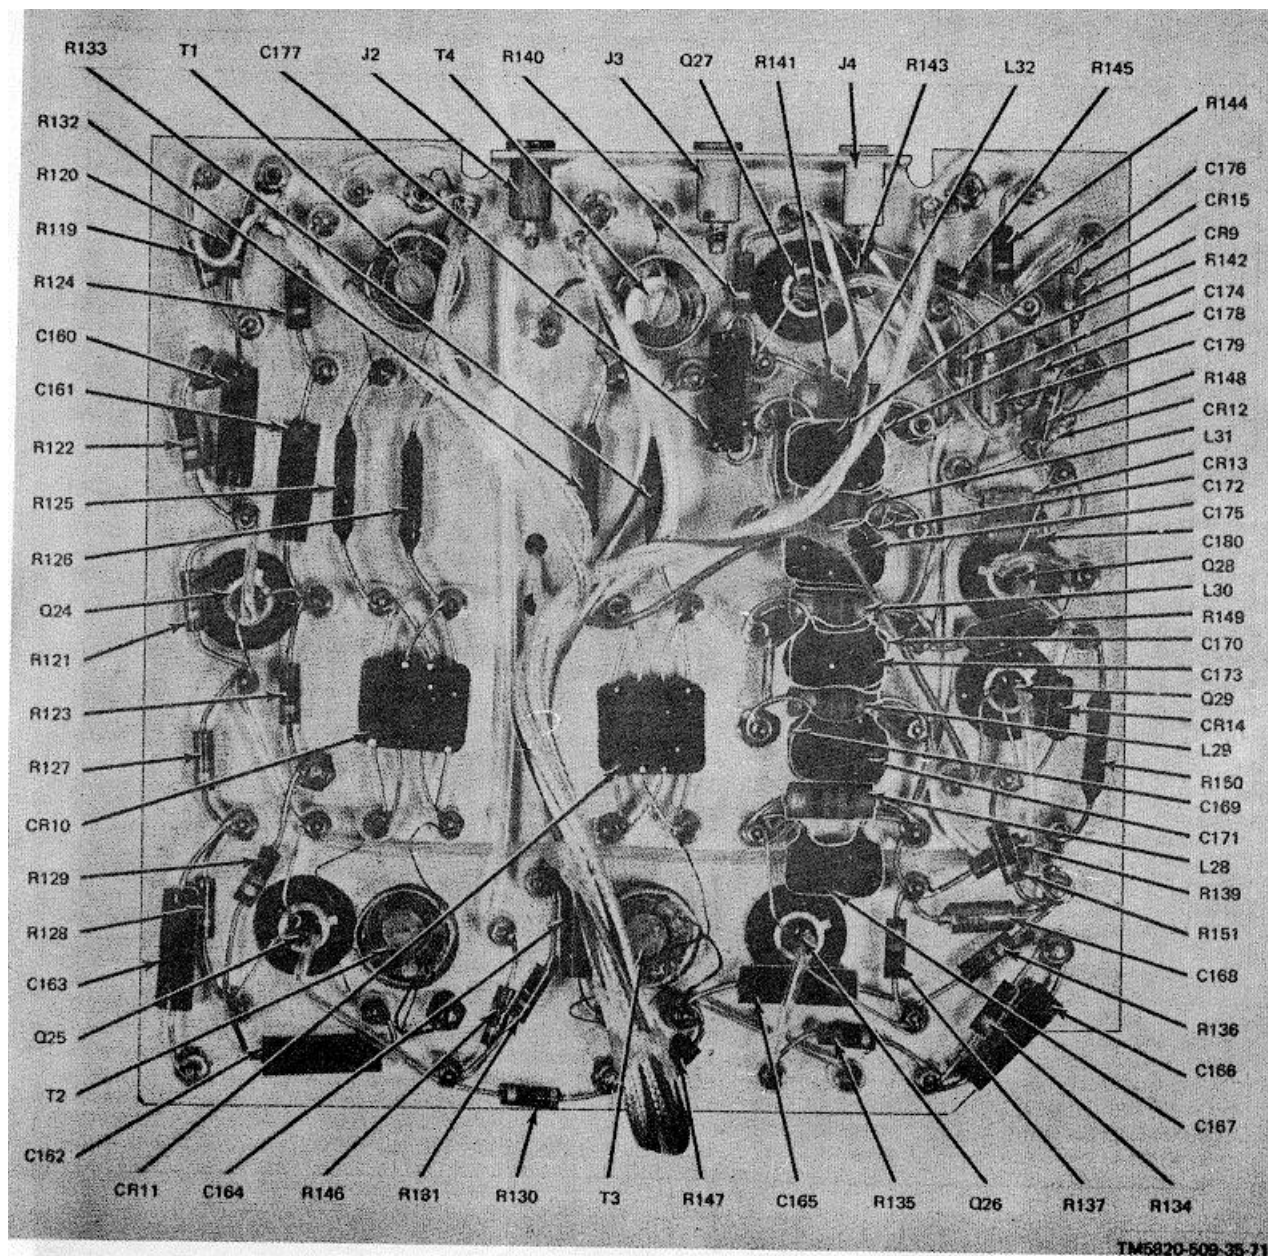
Oscillator Control C-4311/PRC-47 (A8A7), Card Assembly TB1.
